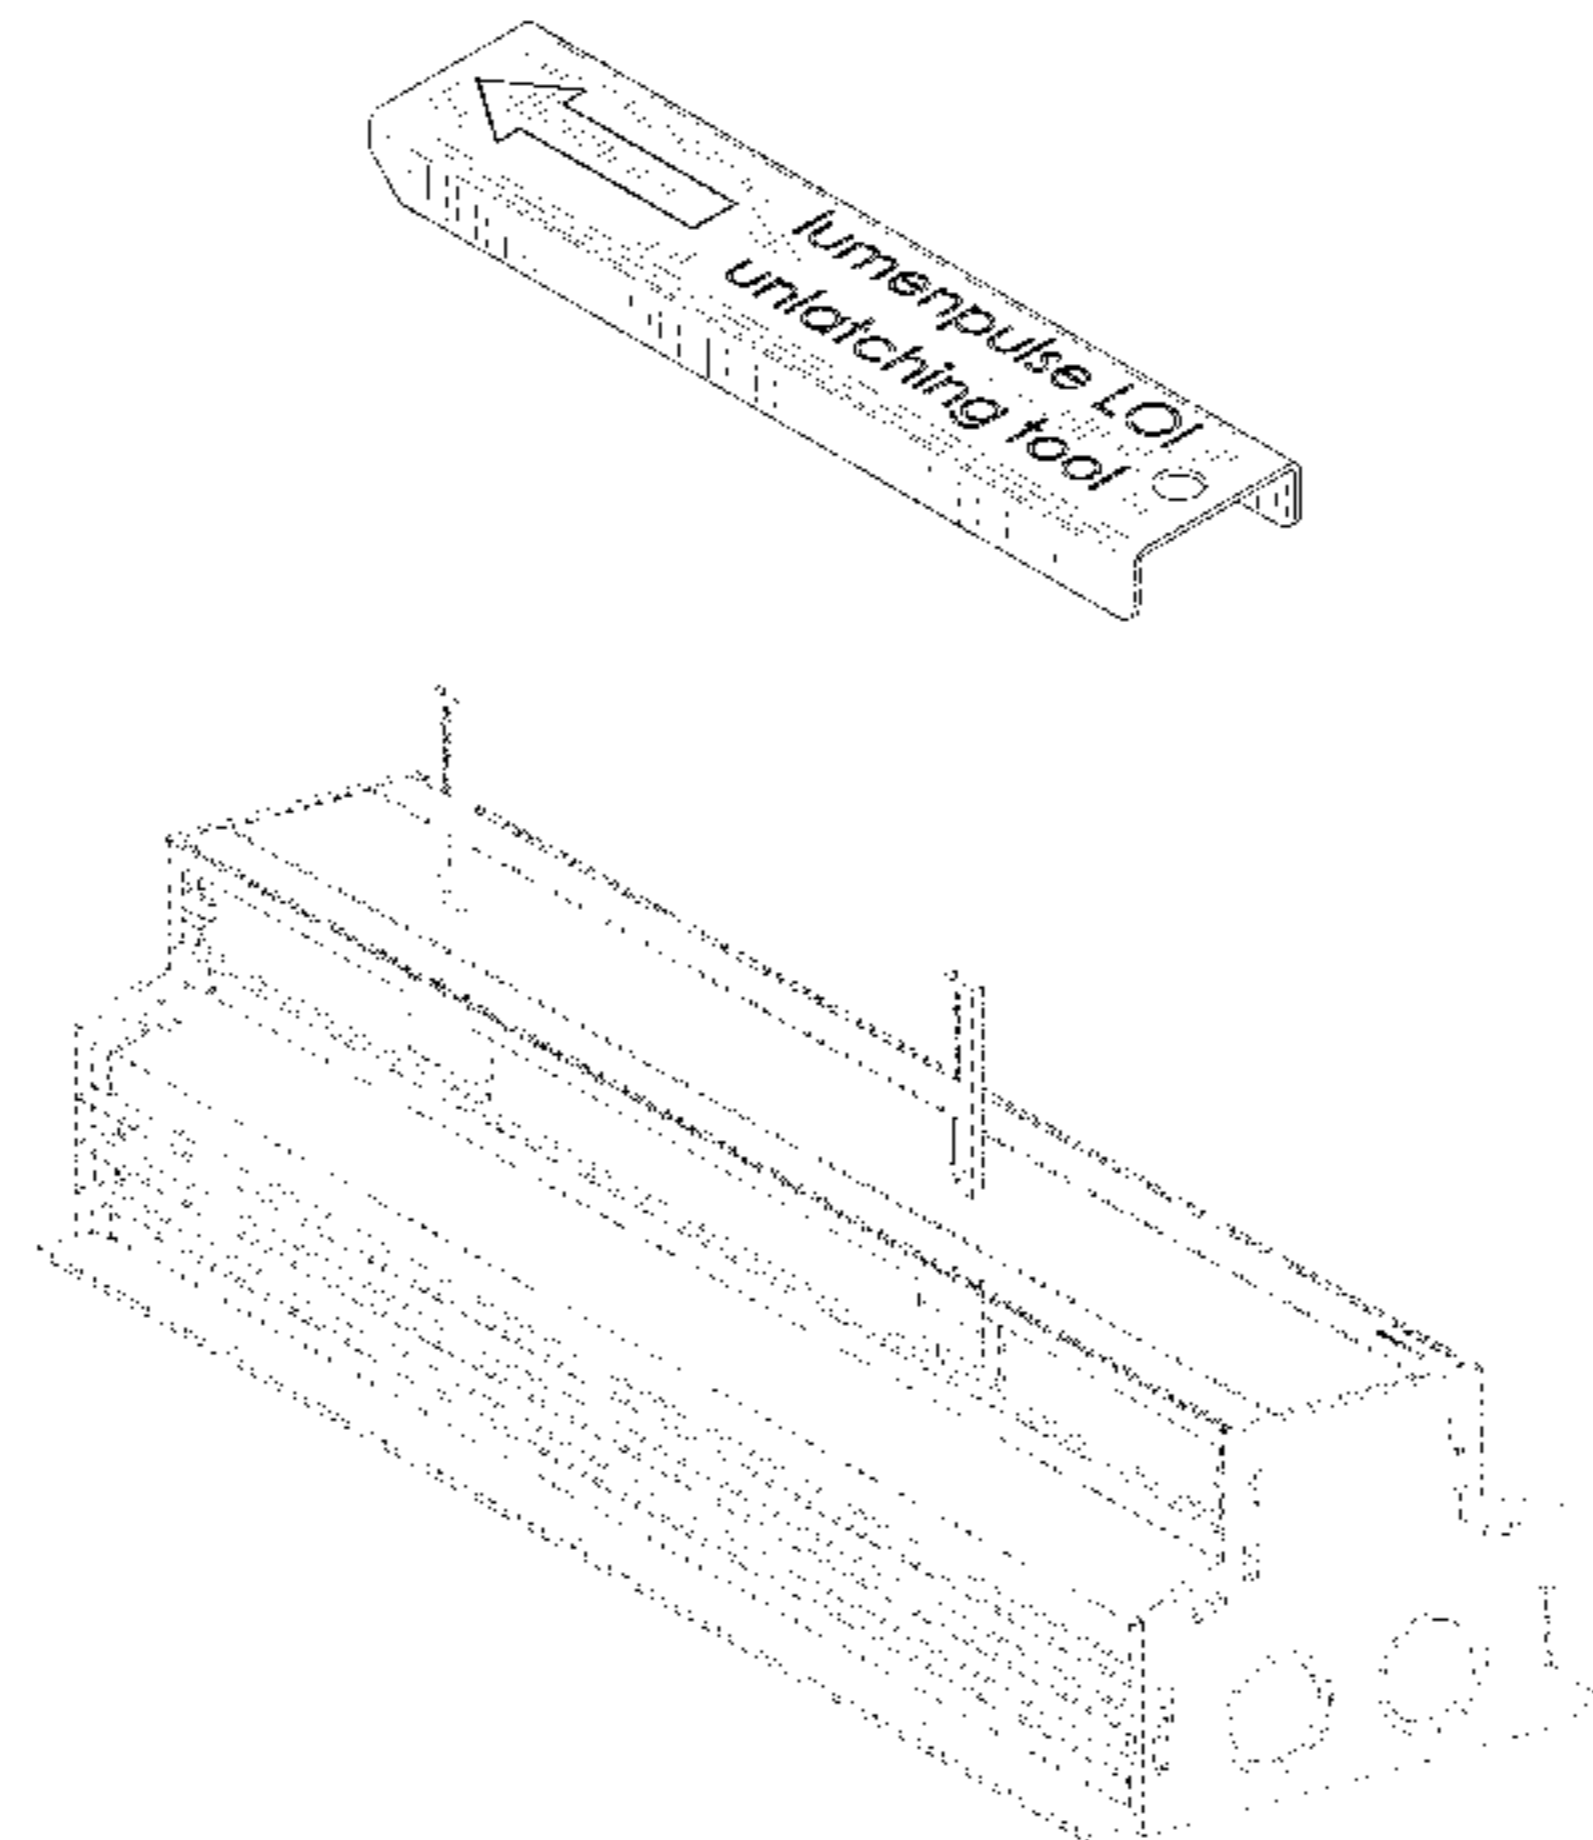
includes a top front isometric view of the light fixture disassembly tool;
